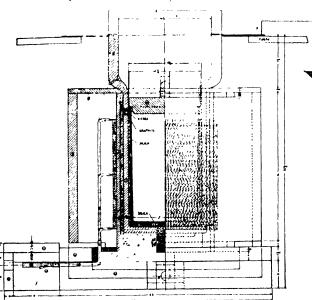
CROSS-SECTIONAL VIEW OF FURNACE FOR GOLD AND SILVER MELTING WITH 18 K. W. OUTFIT
